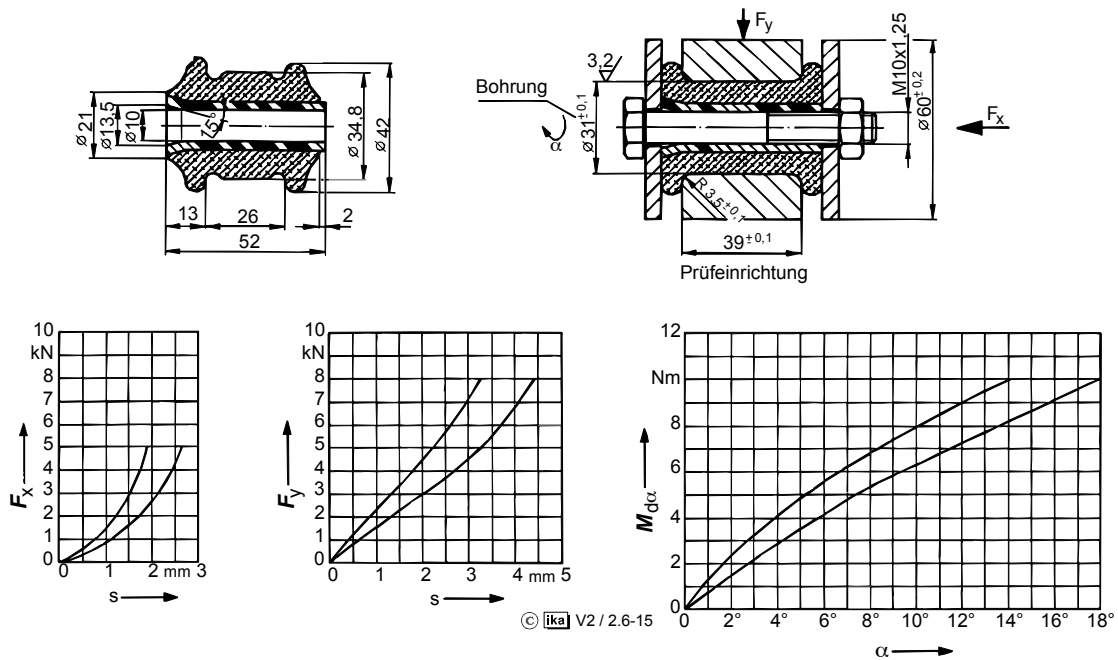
Rubber wishbone mount with scorched internal bushing
